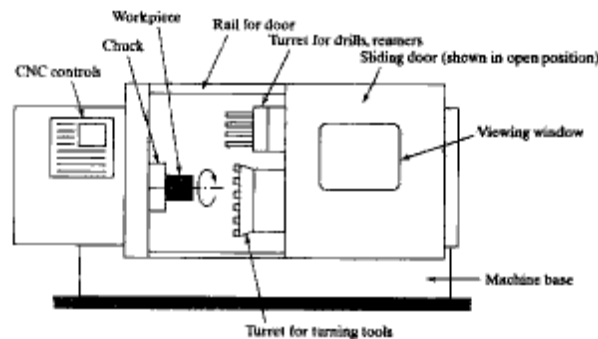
Front view of a CNC turning center showing two tool turrets, one for single point turning tools and the other for drills and similar tools. Turrets can be positioned under NC control to cut the work piece.
